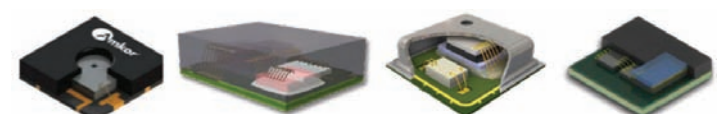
Example sensor packages (left to right): exposed die, overmolded, cavity and molded/cavity packages.
